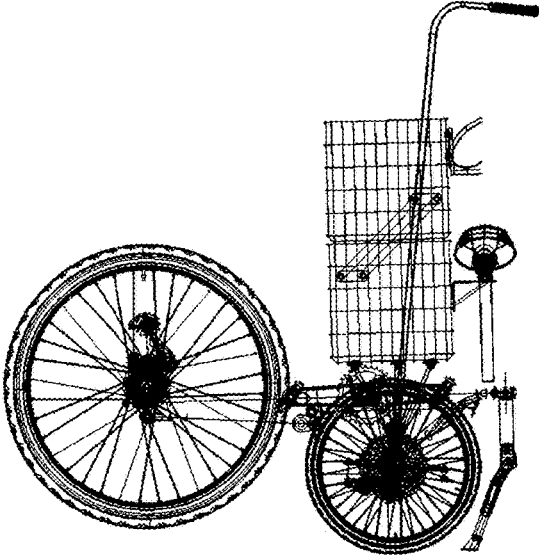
is top plan view of the TWCD in the trike configuration with the basket assembly expanded; FIG. 12 is a top plan view similar to FIG. 11 but showing the TWCD in the 3WC configuration.
